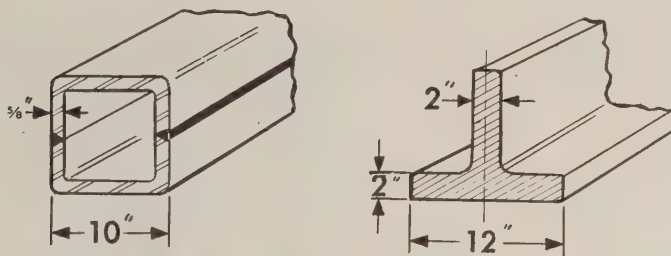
DESIGN DETAIL OF SPOKES IN A WELDED MACHINE PART
